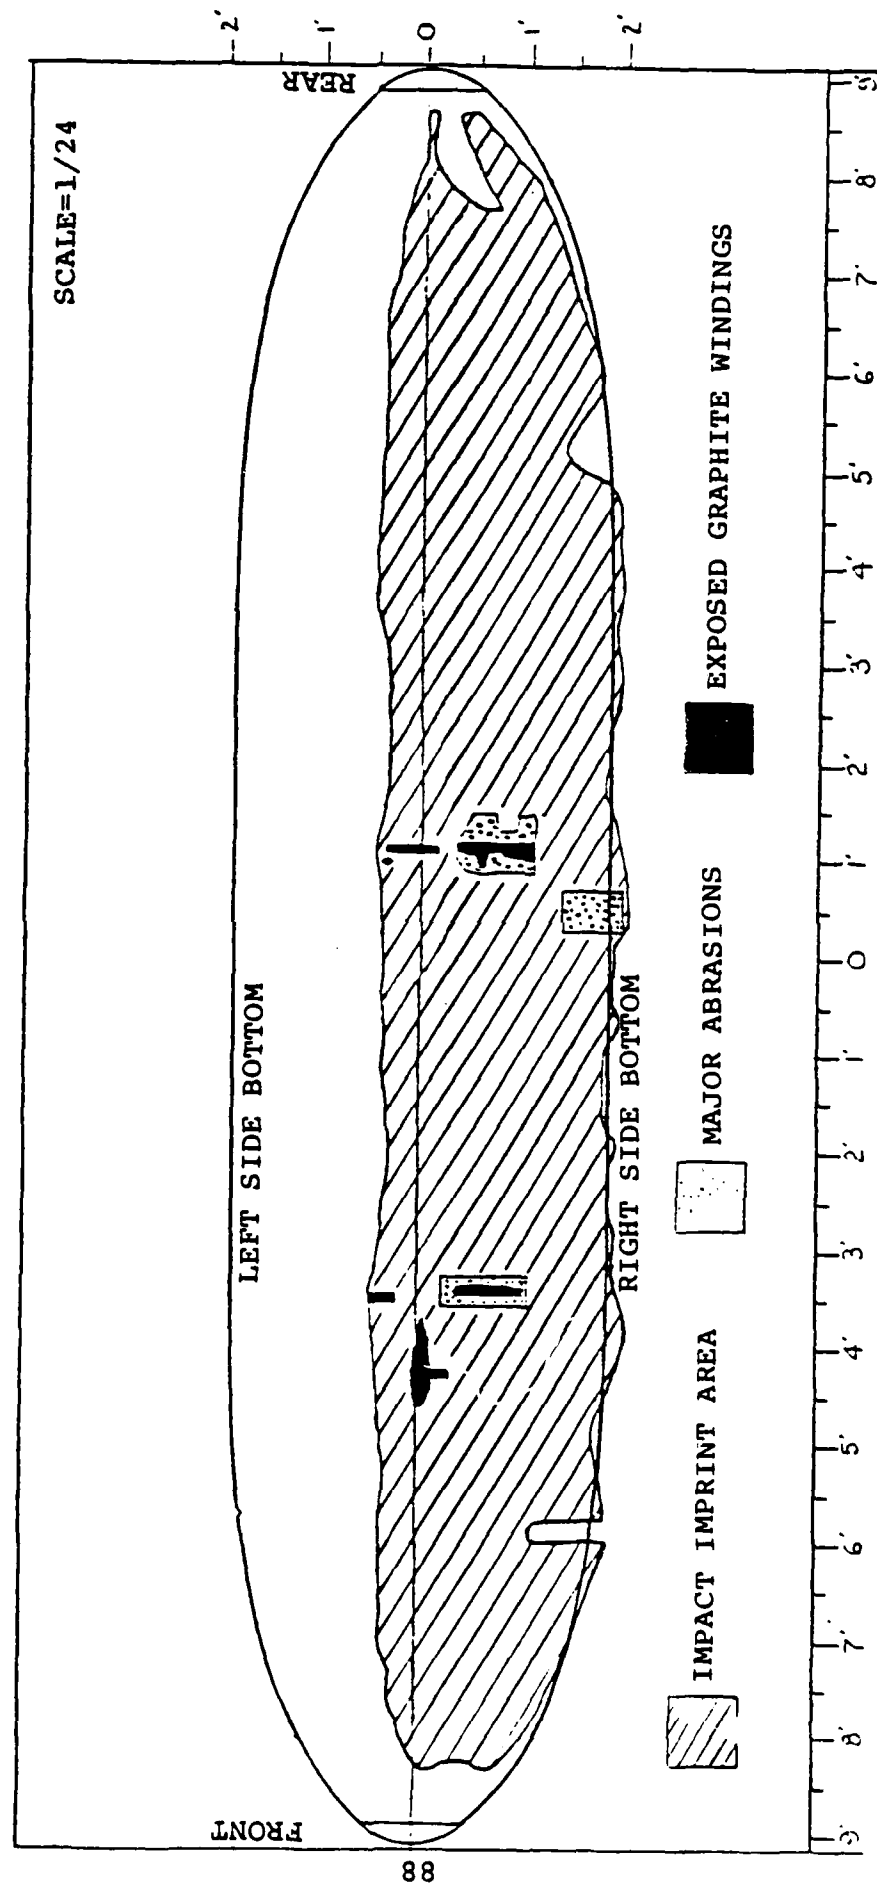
FUEL TANK SN0002 IMPACT IMPRINT SKETCH.
